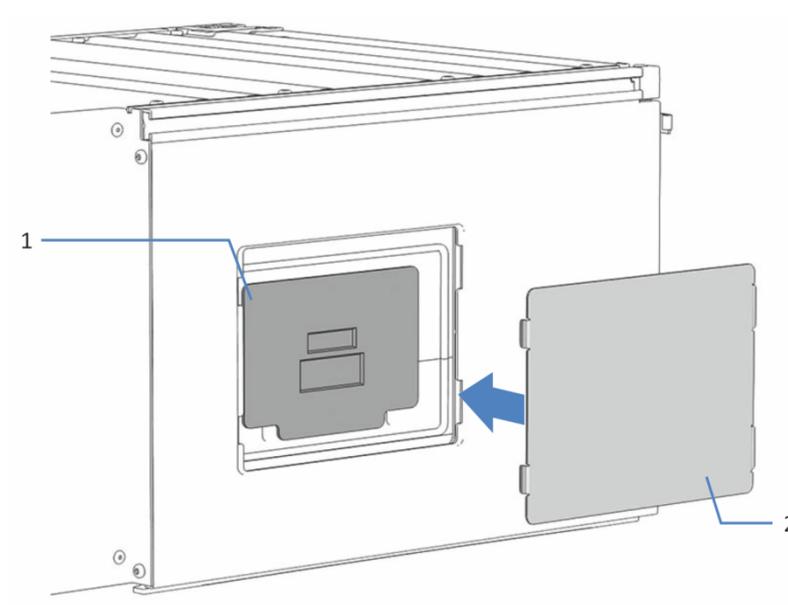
Closing the Charger opening (here with metal cover plate clamped in the opening)
